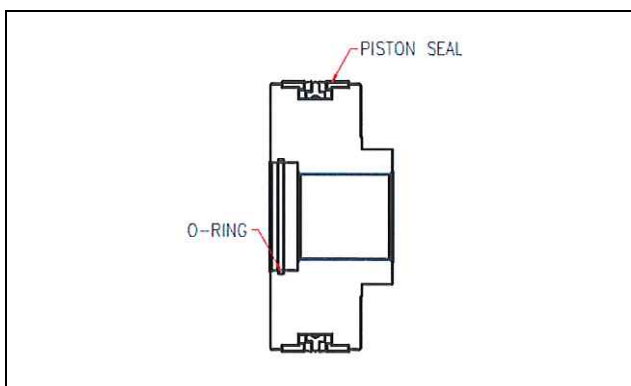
Piston Seal Removal (Tower Lift Cylinder)
